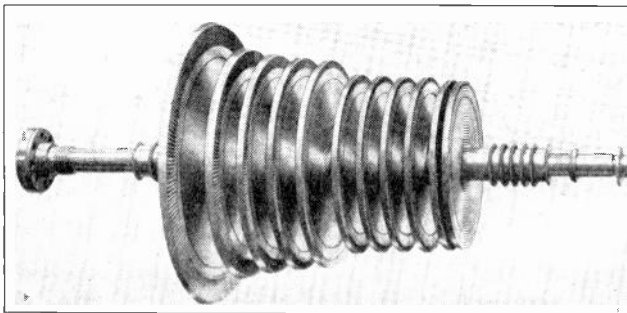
Complete rotor of a modern steam turbine, showing several sets of moving blades through which the steam passes in succession. Courtesy of Elliott Company.
